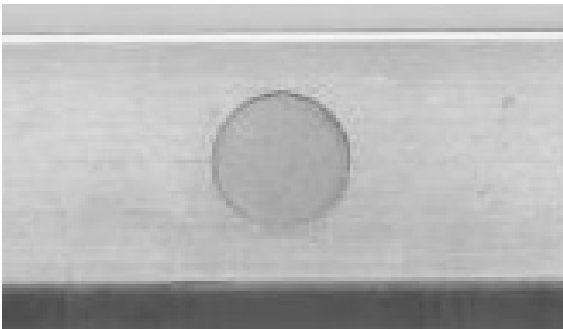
Surface of A6061-T6 specimen machined using optimal EDM parameter settings (A1B3C1D2)
